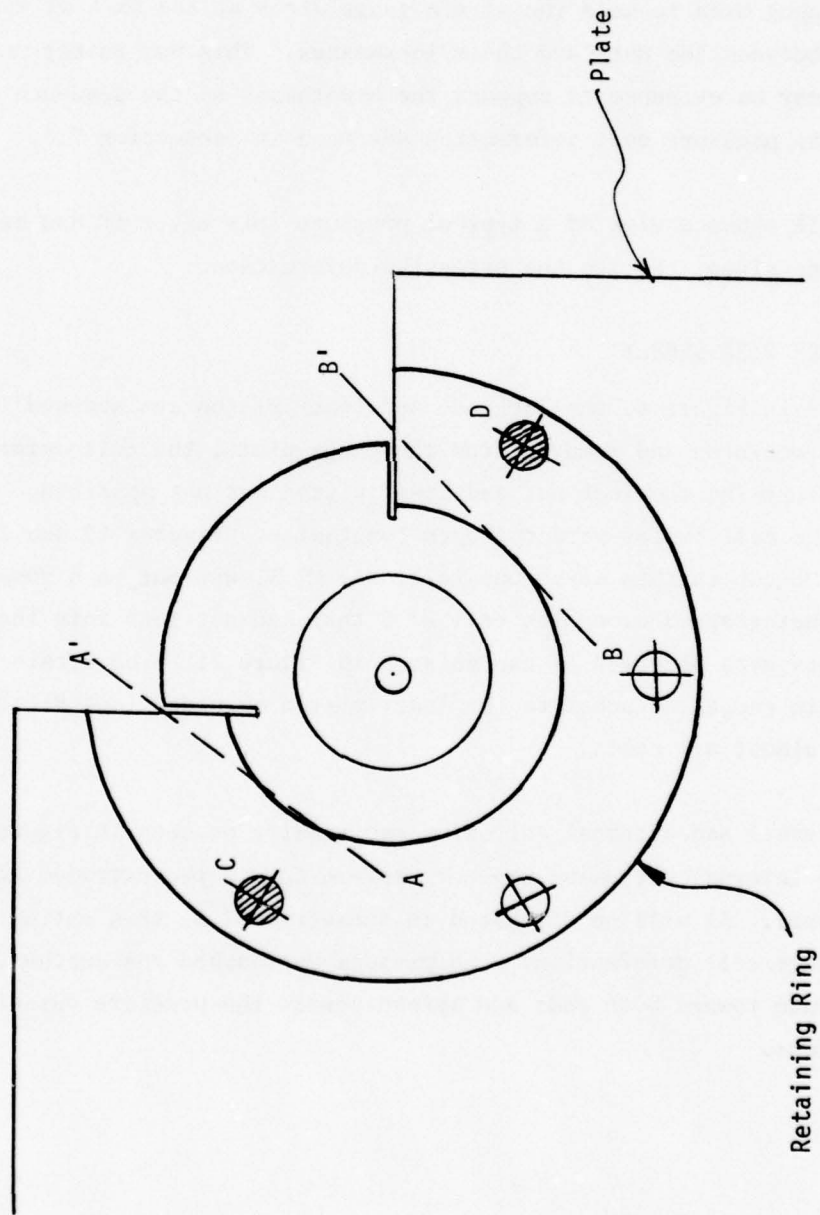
Additional saw cuts to remove pressure cell. Bolts C and D were also cut.
